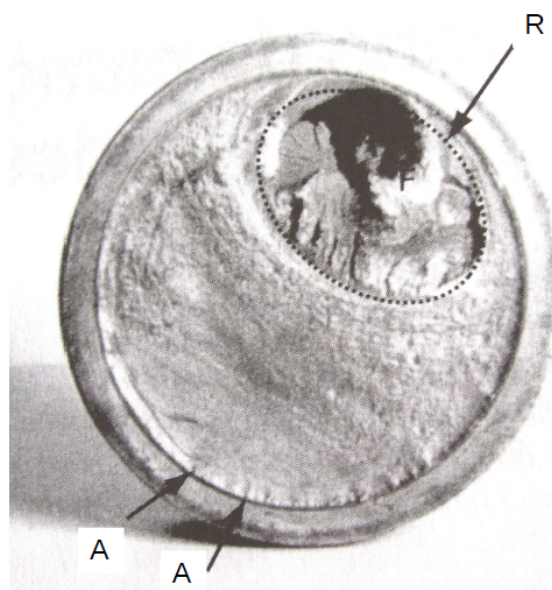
Fracture surface on a wind turbine blade in Lemaignan [141]: Initiation zone is marked by A, the striation zone of stable crack propagation is comprised between A and R. Finally R corresponds to ductile unstable fracture.
